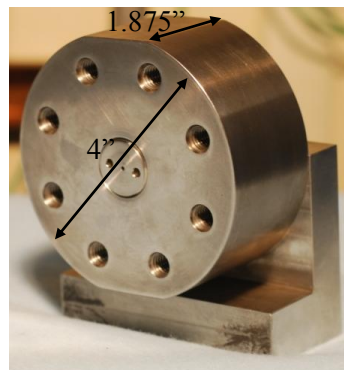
Head end of test set-up installed with L-bracket and flashtube section.
